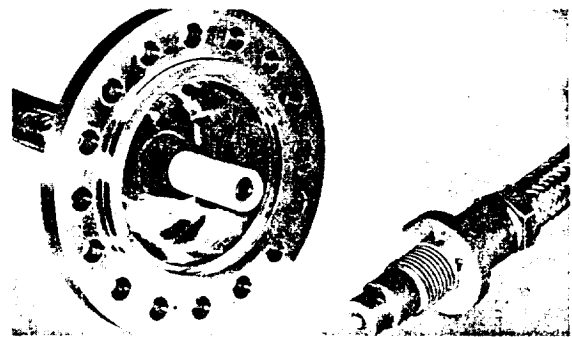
Spark igniter assembly. At right, screw-in spark plug; at left, cable connector.
